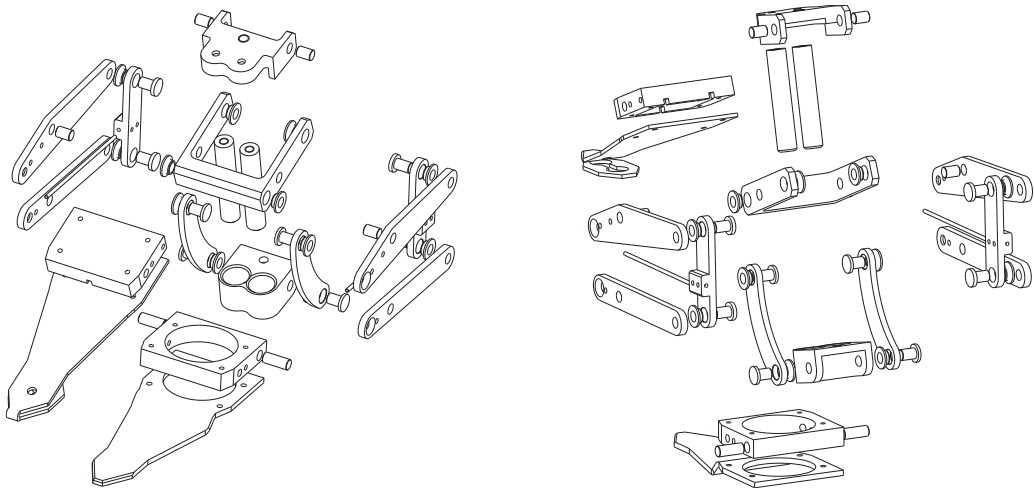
Exploded views of the fingers assembly without the mounting plates and the driver
